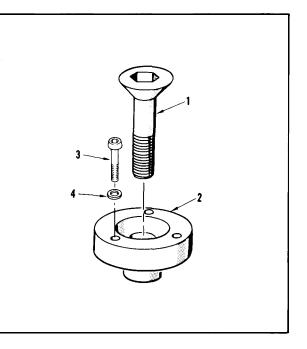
Vibration Transducer Adapter, Part No. 171576, Location of Parts
